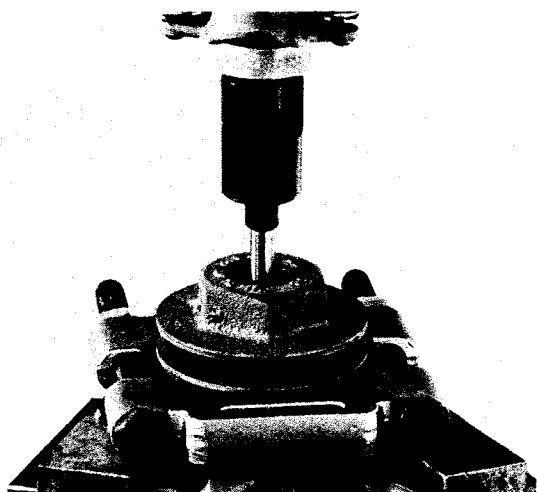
, (N10862). Press idler shaft assembly from pulley
